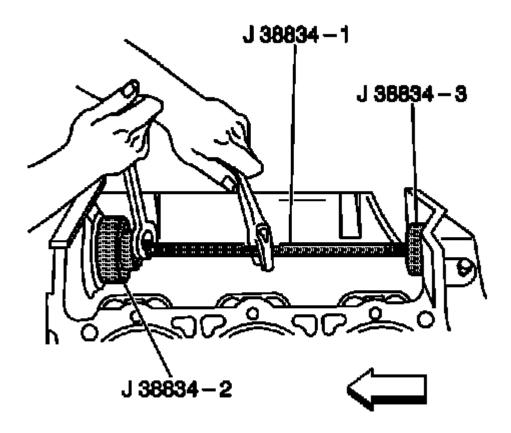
Installing Balance Shaft Rear Bearing Using J 38834, J 38834-1 & J 388342 Courtesy of GENERAL MOTORS CORP.
